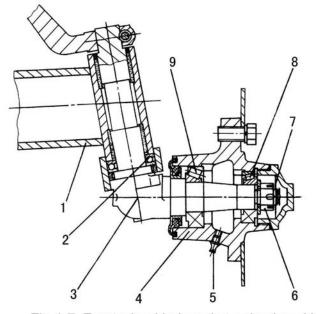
Front wheel hub and steering knuckle 1.Front axle 2.Bearing 8106 3.Steering knuckle 4.Front wheel hub 5.Greaser 6.Nut 7.Split cotter 8.Bearing 7205 9.Bearing 7206
